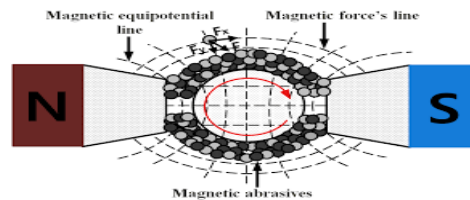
Schematic of the external cylindrical surface of the ball bearing by MAF (6)
